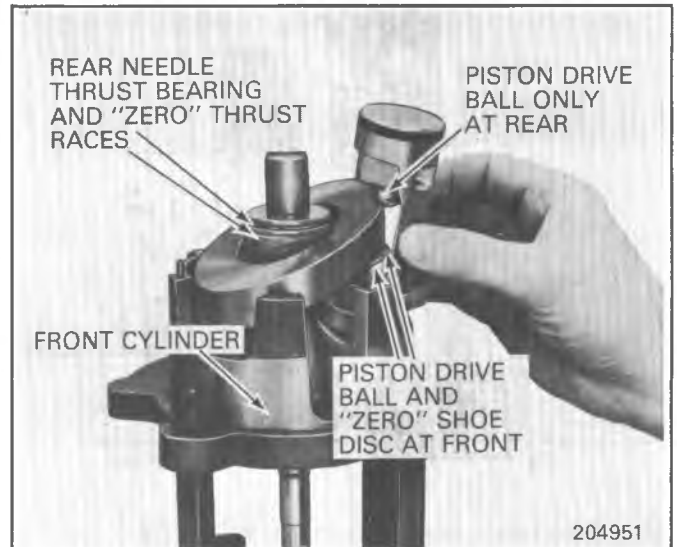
D-38 Installing A-6 Piston During Gaging Operation
